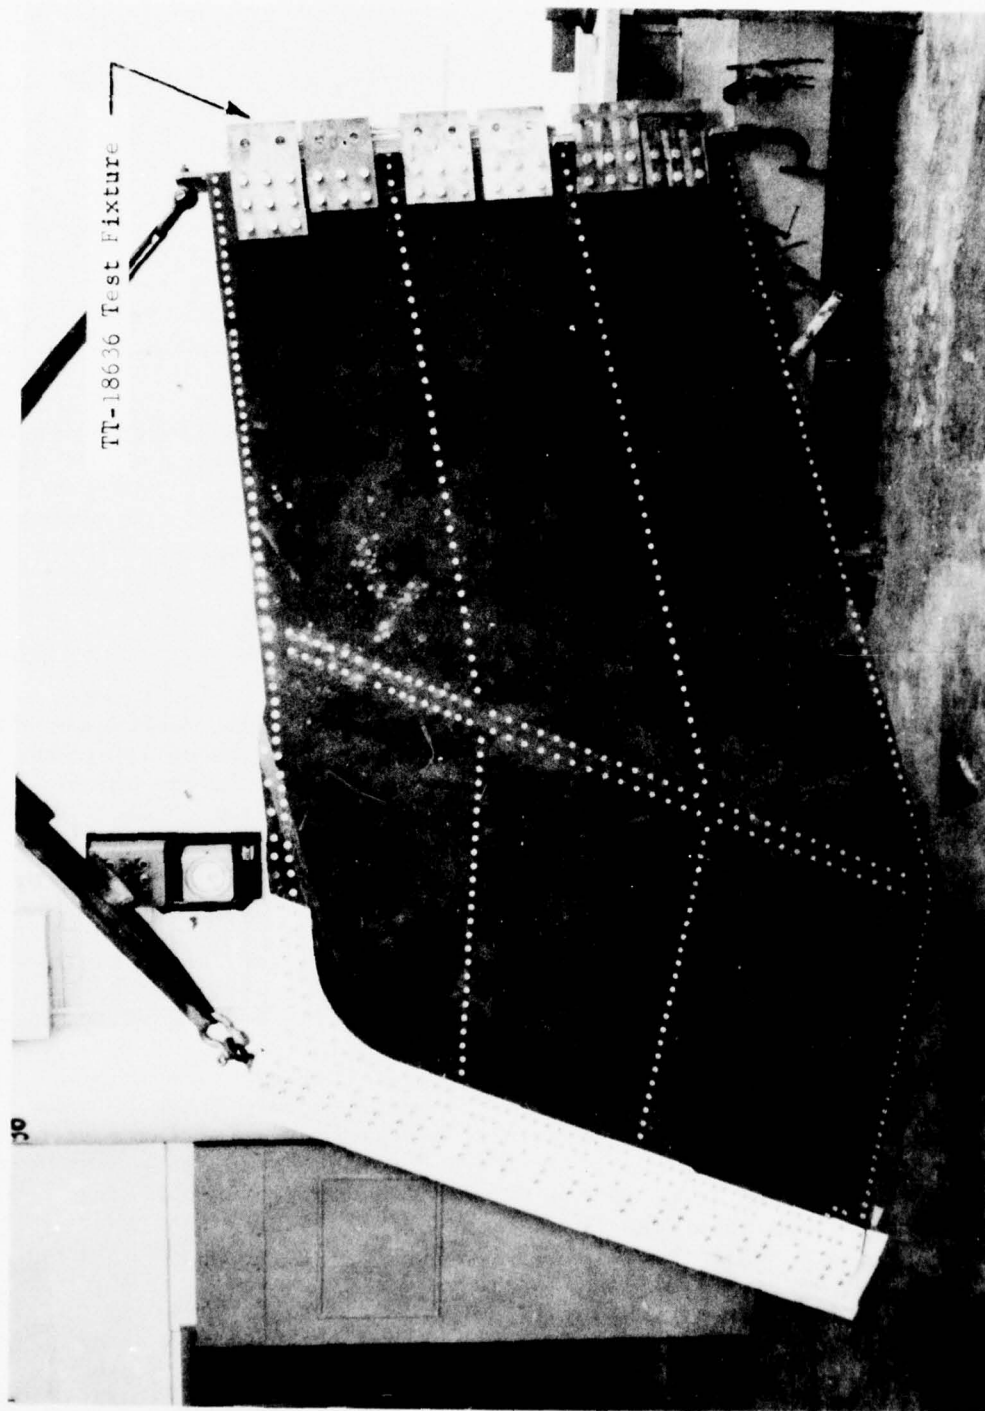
COMPOSITE WING BOX ASSEMBLY - TOP VIEW
